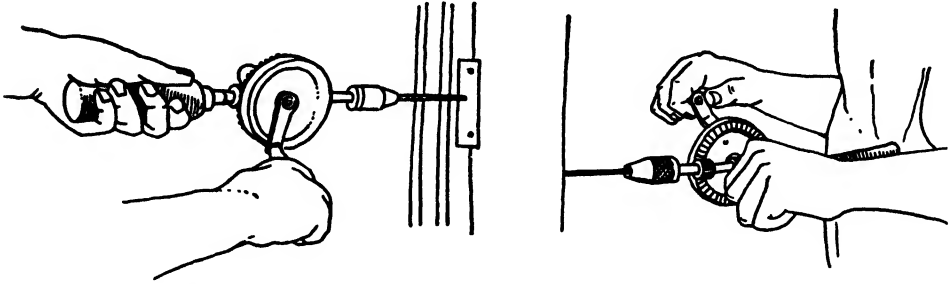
In drilling with a hand drill, hold it straight and steady and turn with a moderate, even speed. It is sometimes more convenient to hold the drill by the side handle and lean against the end handle. (Stanley Tools)
